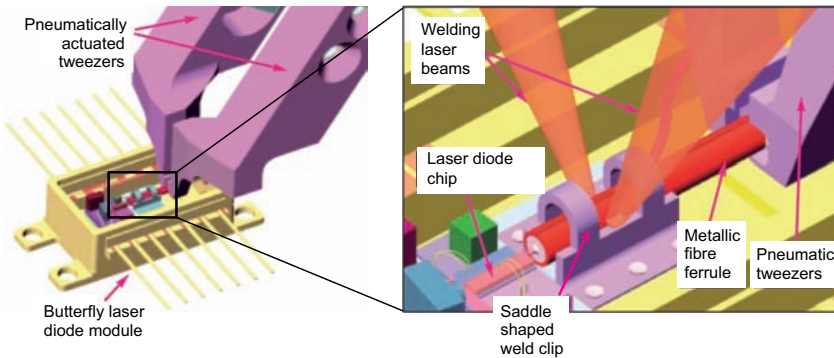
Conventional fibre pigtailed configuration using laser welding (Mobarhan *et al.* 2000)
